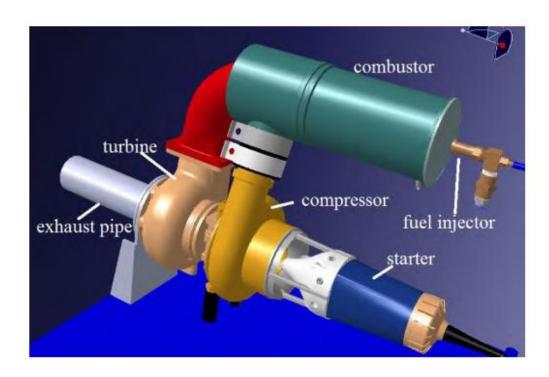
The key components of the gas turbine assembly; the imagined assembly before any design or fabrication was done.
